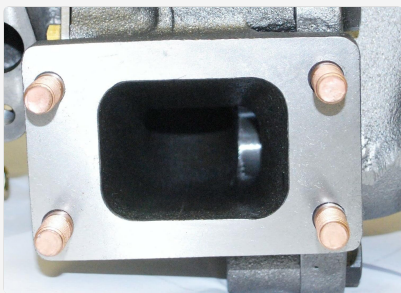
Another side view of the turbocharger, focusing on the exhaust housing and its mounting flange. This is where the turbo connects to the exhaust manifold.
